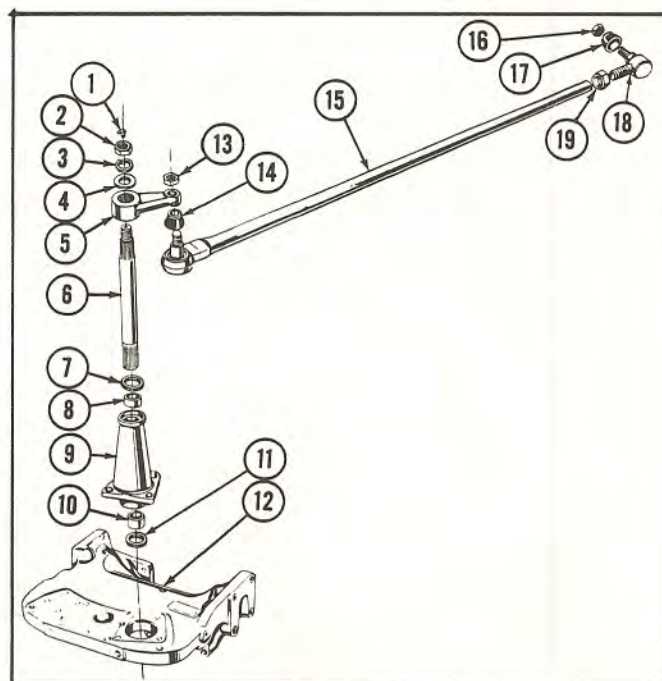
Pedestal and Drag Link Assembly Nomenclature
